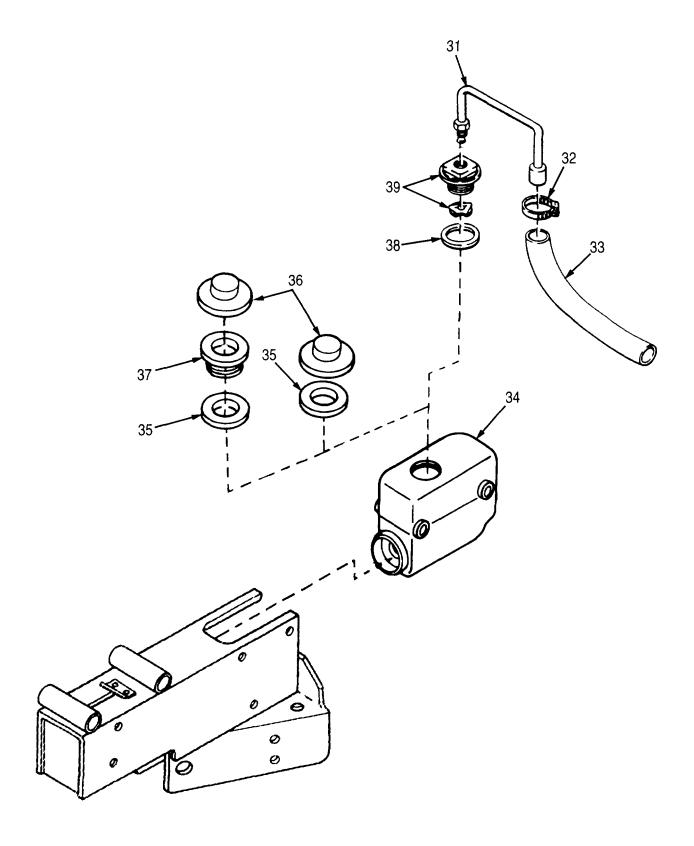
Hydraulic Brake Actuator Assembly, Surge (Sheet 2 of 2)
